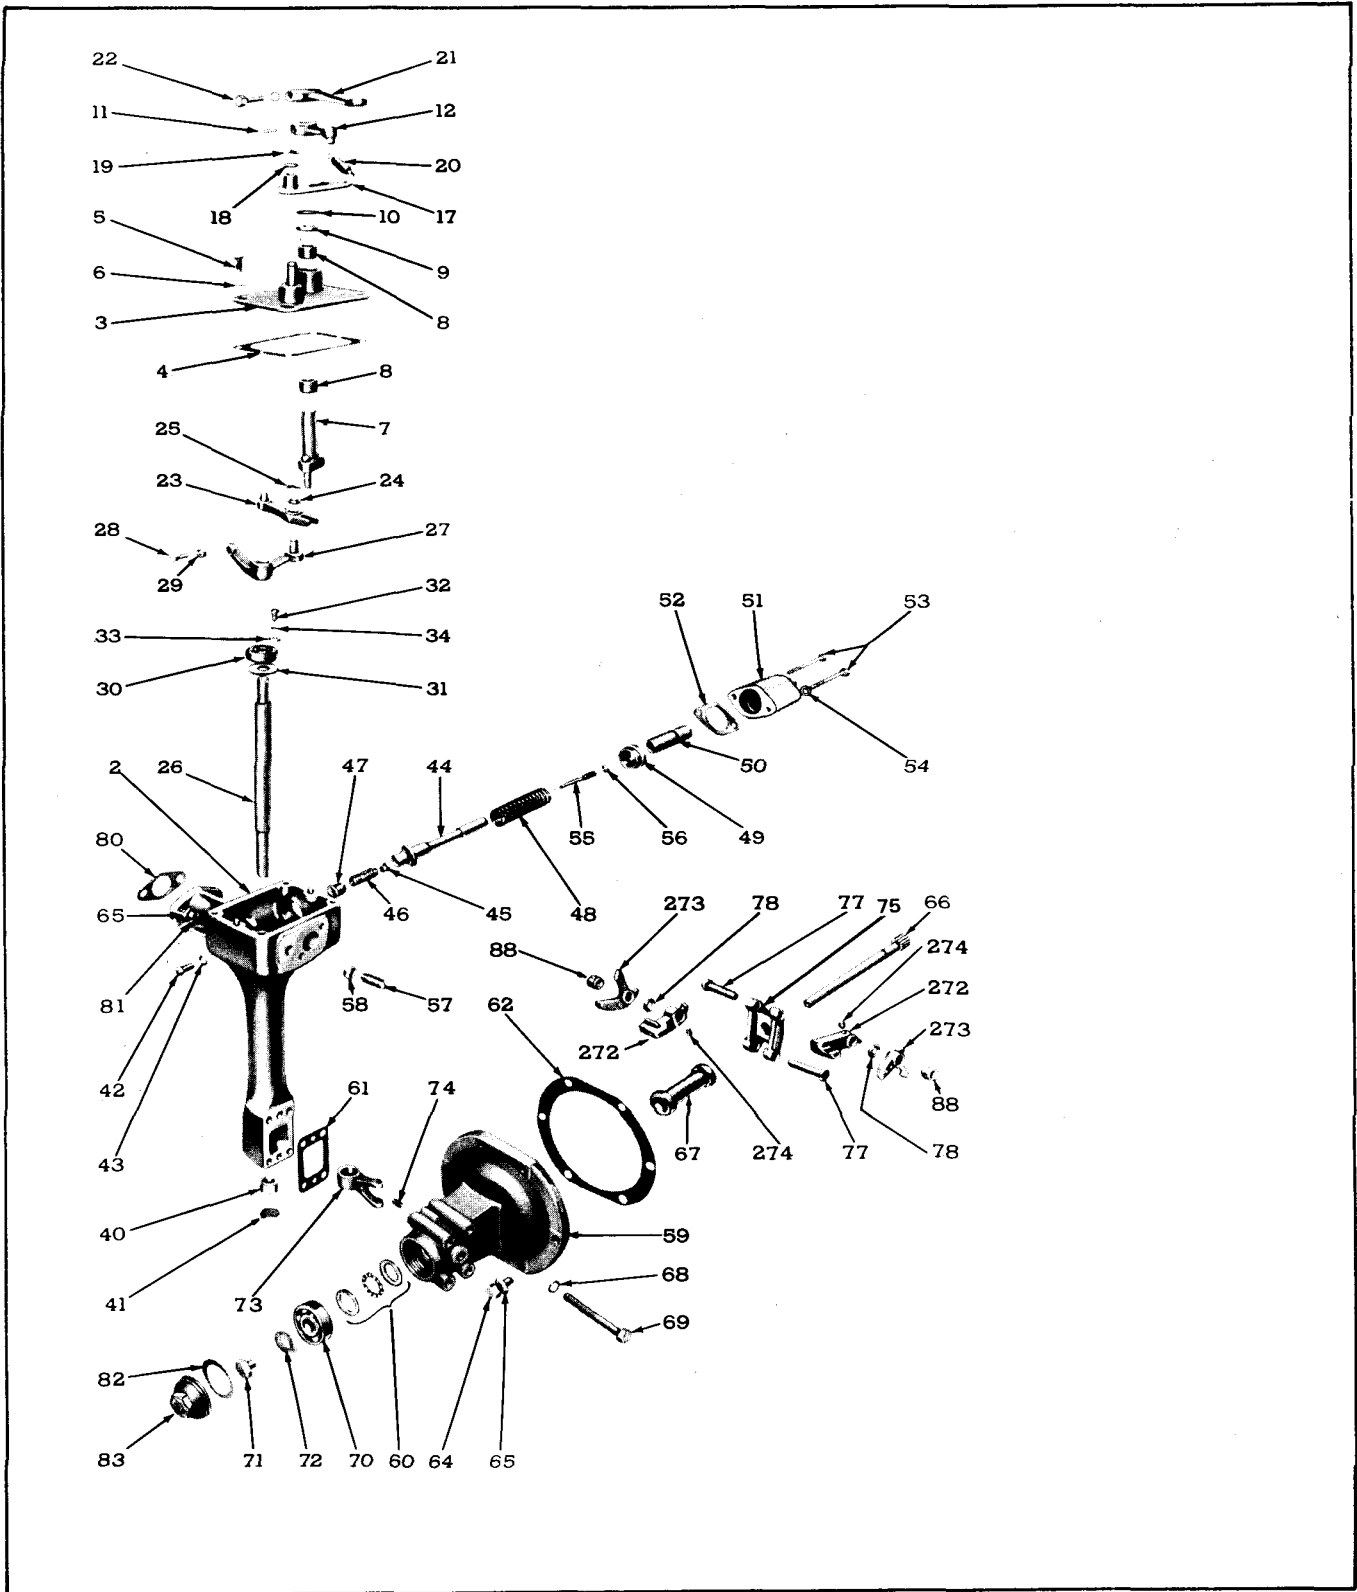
Limiting Speed Governor Details and Relative Location of Parts
